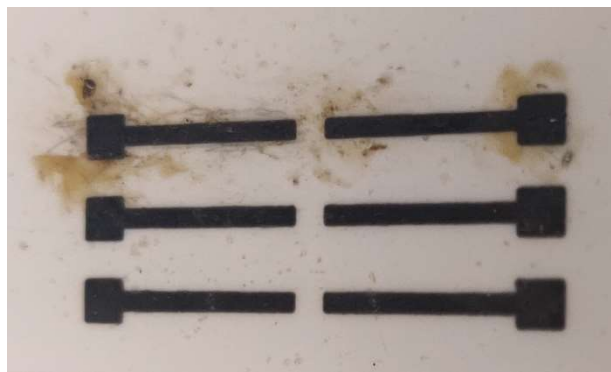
Picture of printed glassy carbon tracks stained by the flux of the soldering tin after a failed attempt at soldering wires to the glassy carbon surface.
